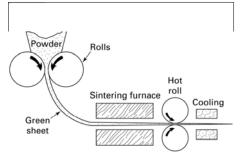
One method of producing continuous sheet products from powdered feedstock.
